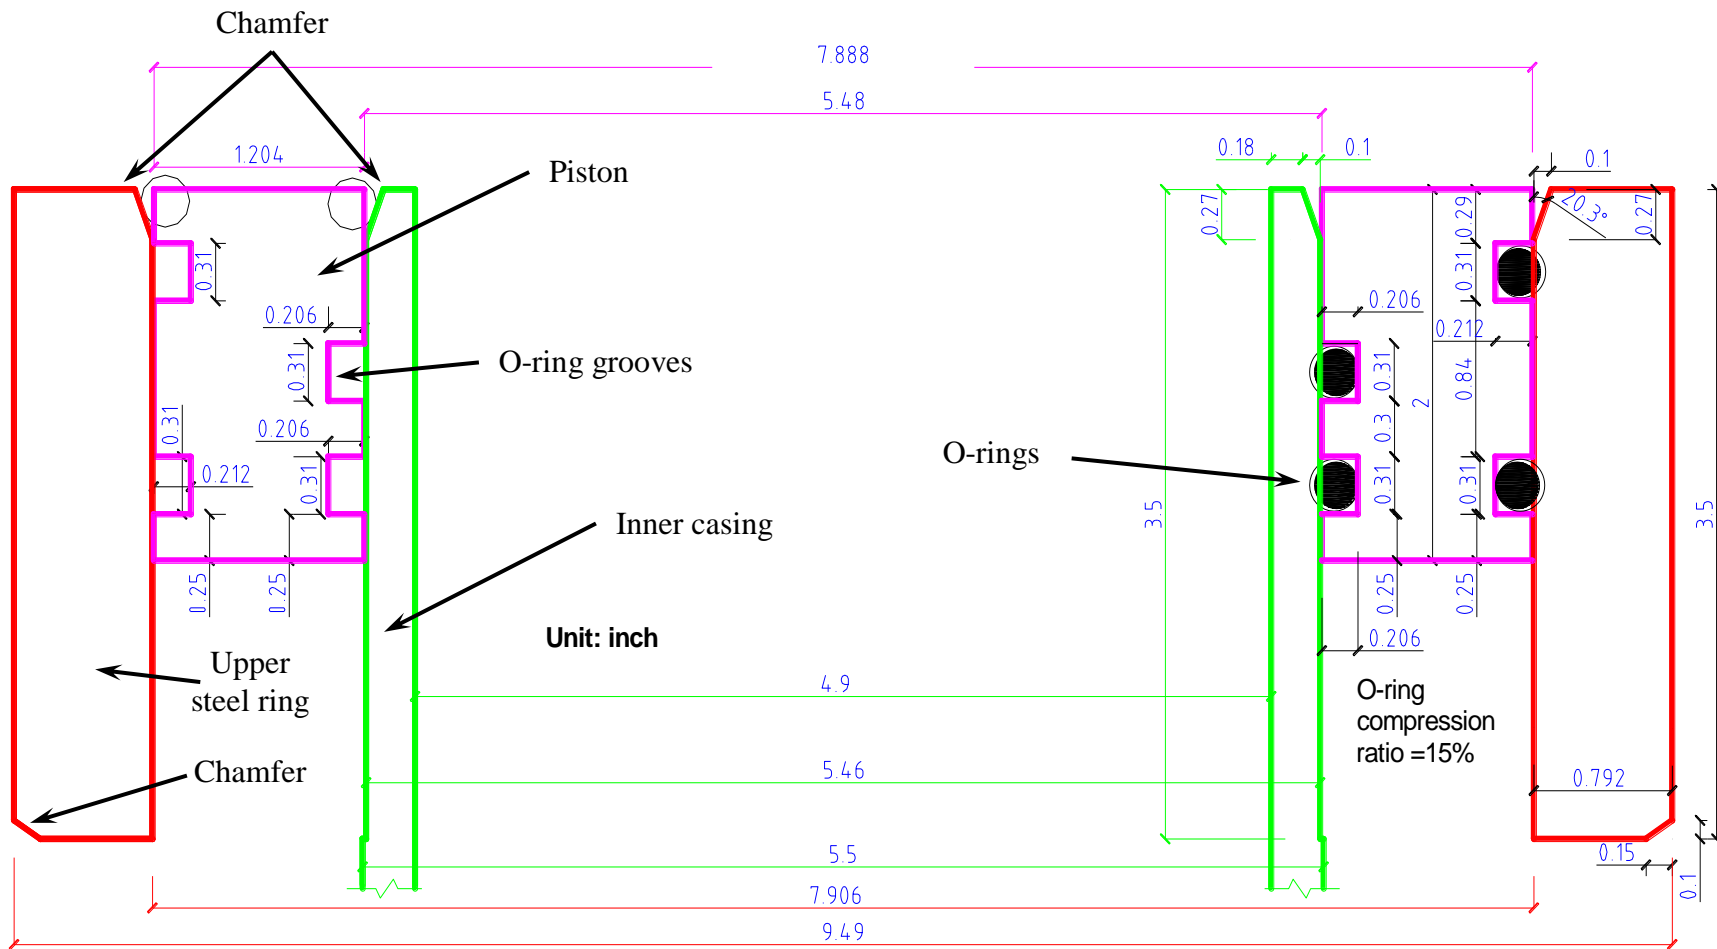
Machining dimensions of piston, upper steel ring and inner casing.
